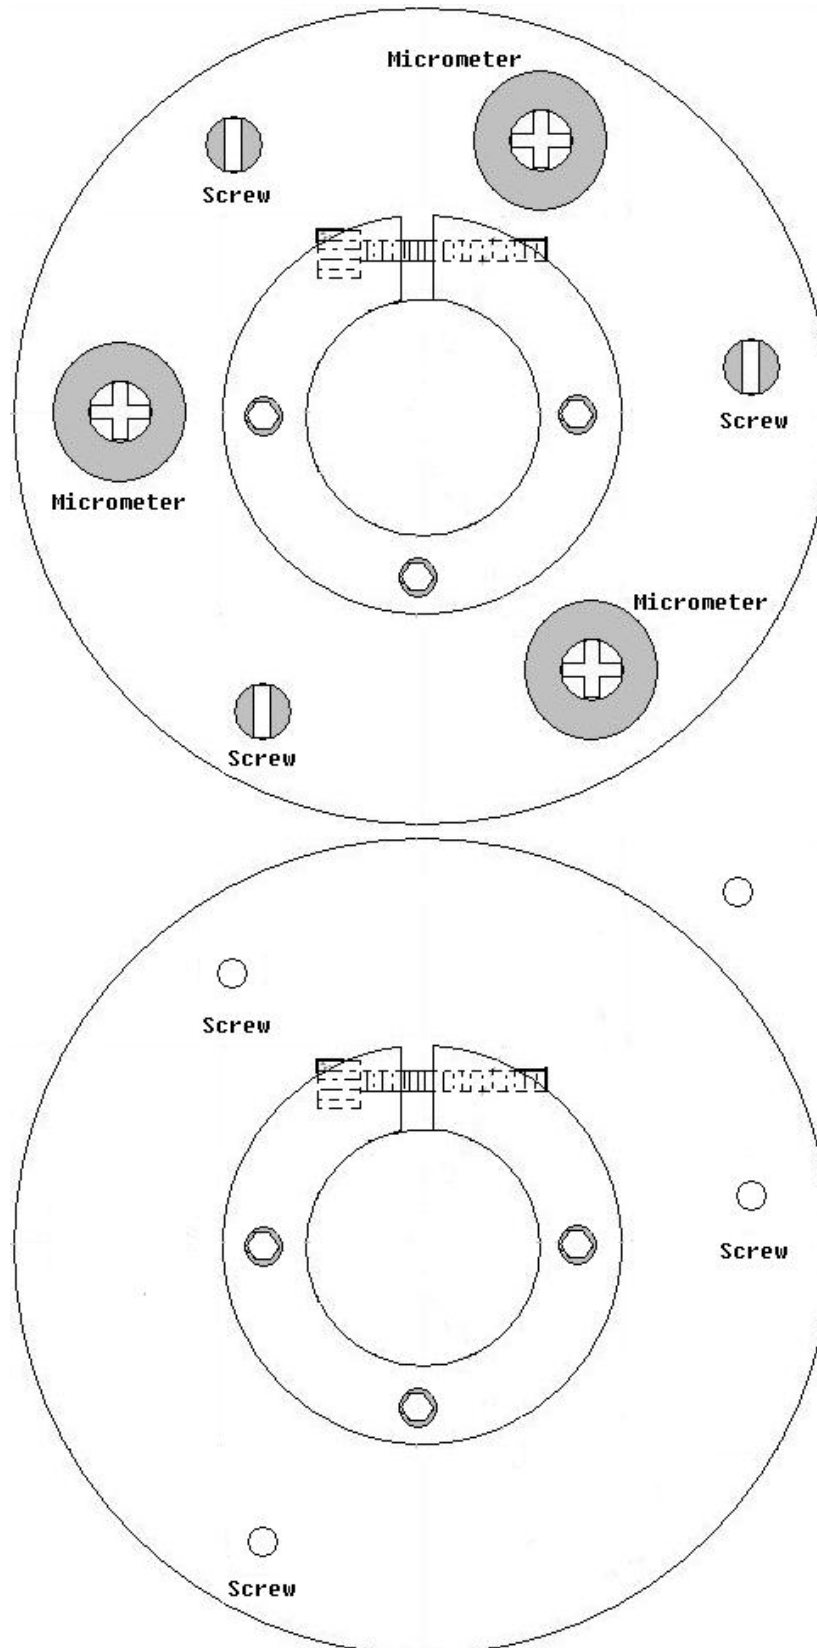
Top (top) and bottom (bottom) view of the contact measurements holder.
